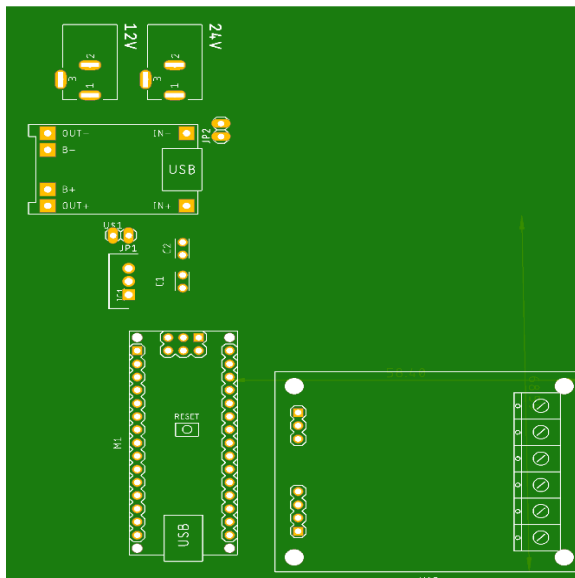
Printed Circuit Board (PCB) Design of controller CircuitMath.
